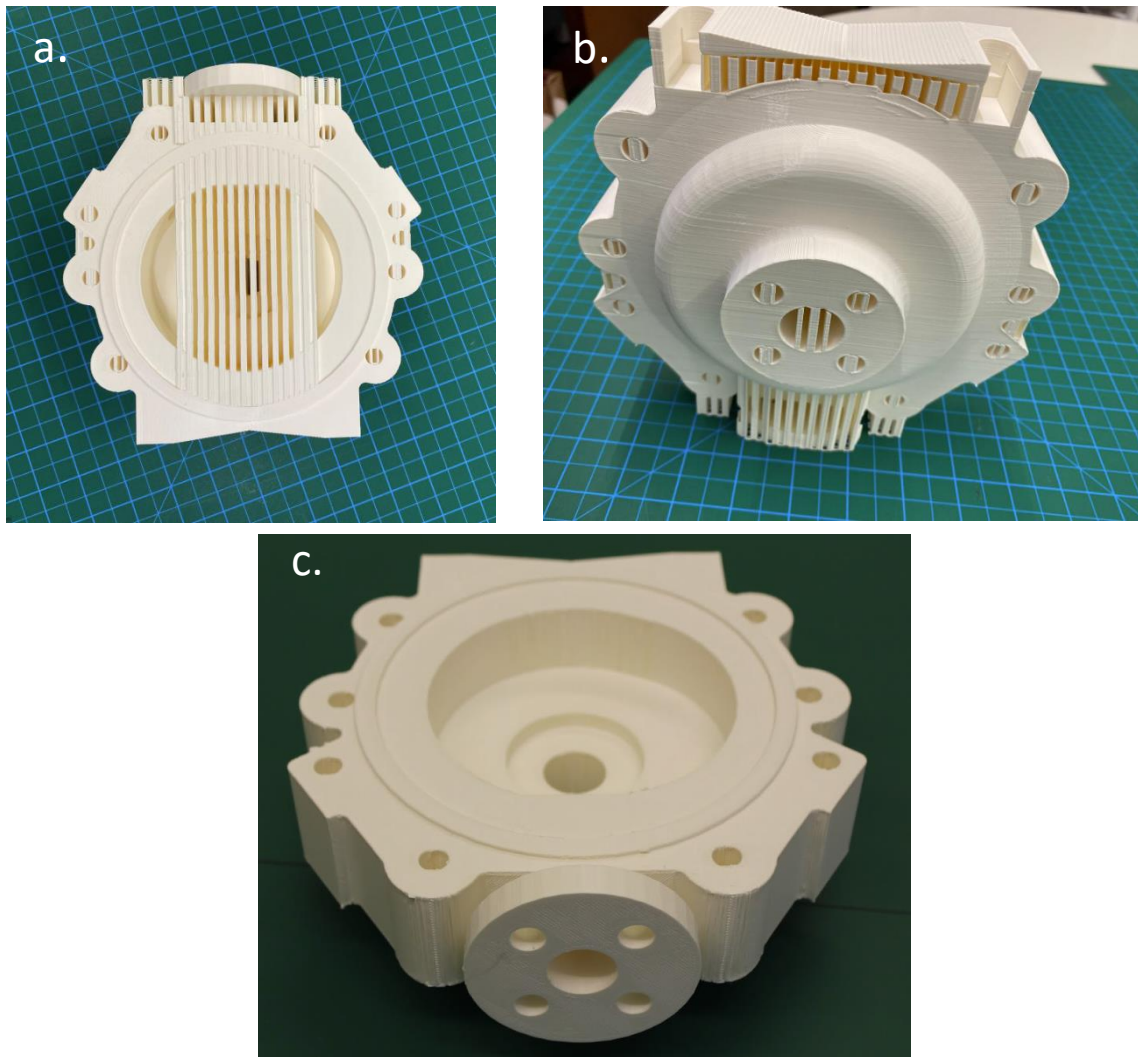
Top left and right pictures portray the Material Extruded Pump Casing before supports were removed, and bottom prototype with supports removed ((a., b., c.)
